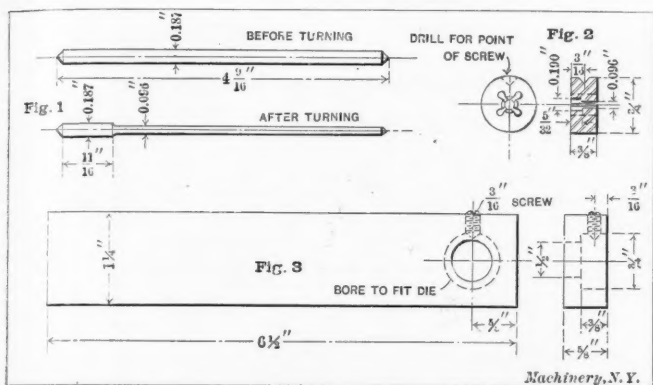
Work before and after turning. Fig. 2. The Turning Die. Fig. 3. Toolholder in which the Die is held
